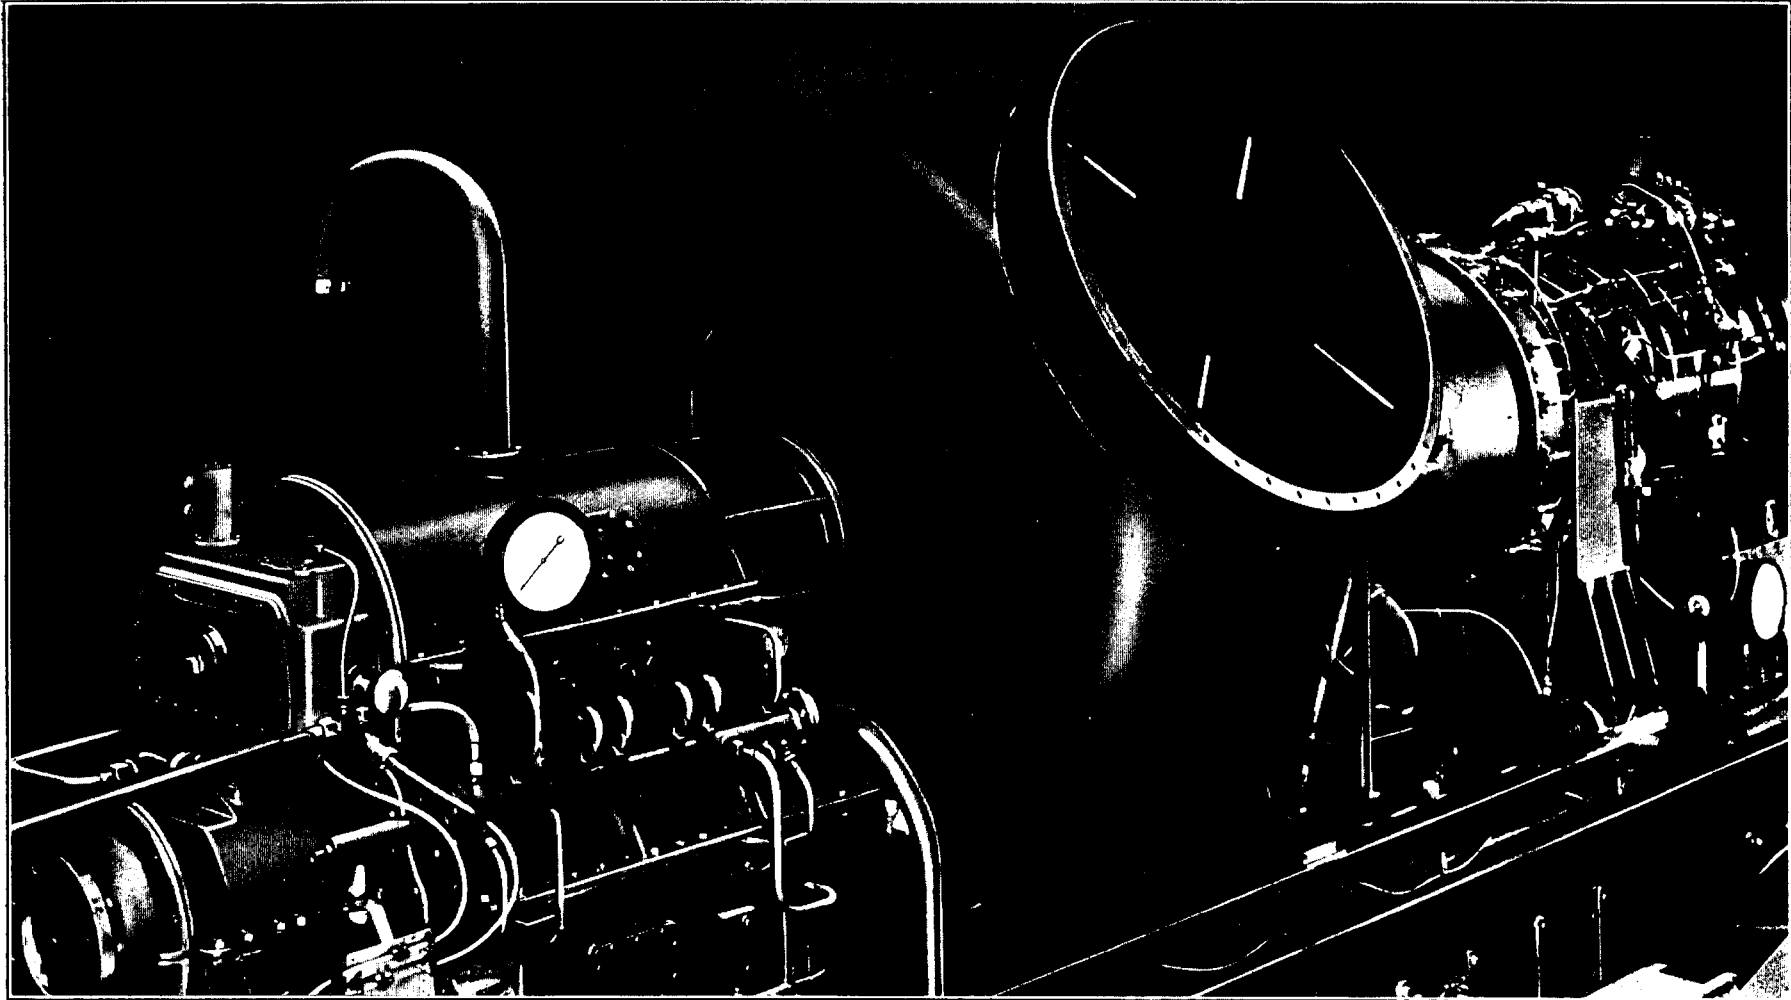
ASSEMBLY OF COMPLETE UNIT ON BENCH TEST, VIEWED FROM POWER TURBINE END
